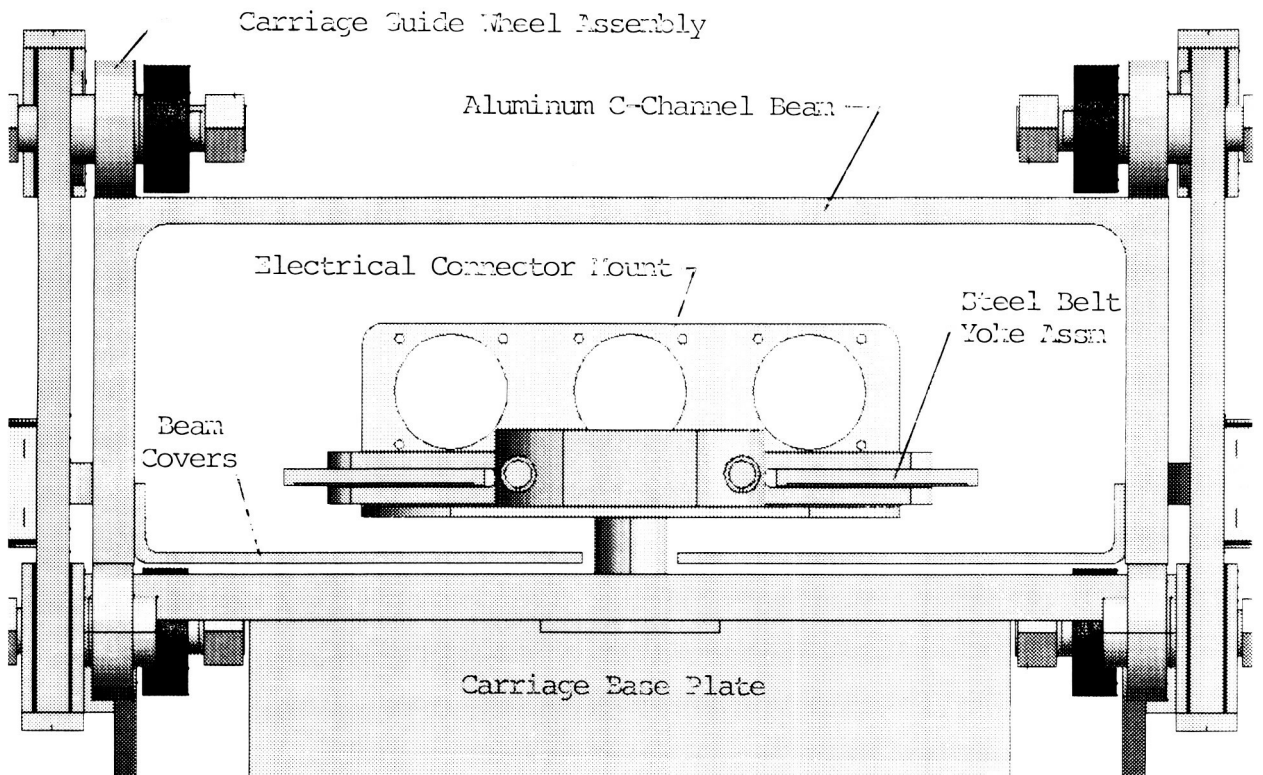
STAR Carriage and Z-Axis Beam Assembly, Top View Cross Section
